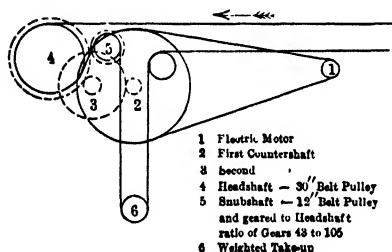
Snub-shaft Geared to Head Shaft and Acting as Second Pulley of Tandem Drive. (Lamson Company.)
